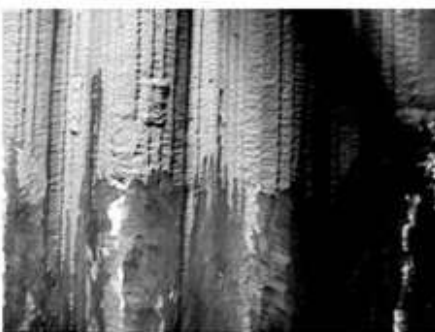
Repair welding can be performed on the corroded waterwall overlay by grinding followed by overlay welding. An alloy 625 weld overlay on the waterwall after 10 years of service in a RDF unit. Shown in the photograph are two tubes and three membranes.
